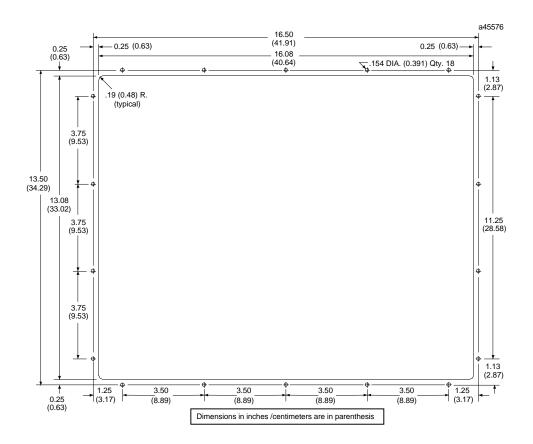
Mounting Hole Dimensions, Touch Station and Glide Station Units
